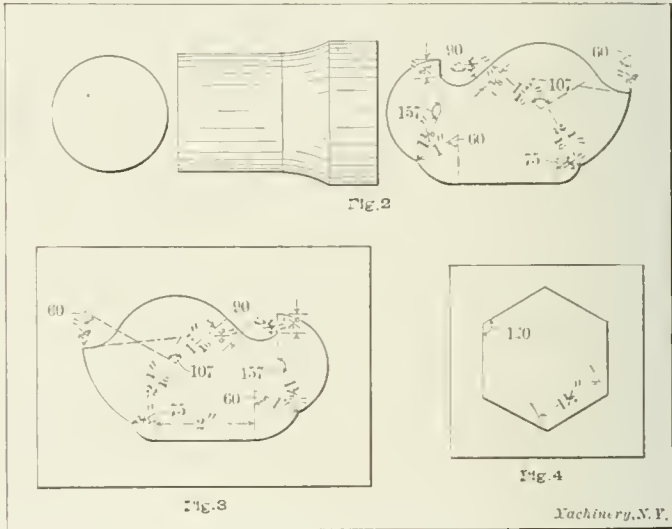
Punch of Irregular Shape that can be produced readily by this Attachment. Fig. 3. Die corresponding to Punch, also made by Attachment. Fig. 4. Another Class of Work to which Attachment is adapted
